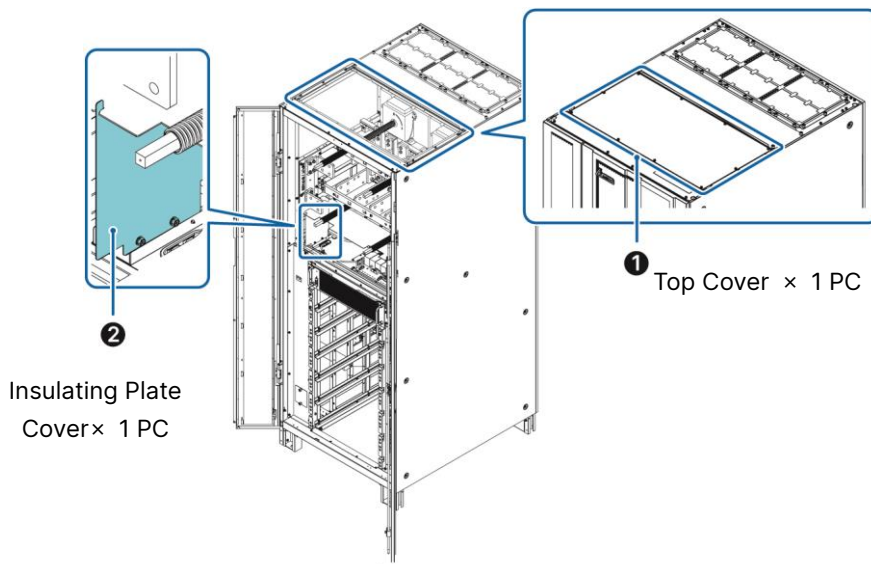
Remove the Top Cover & Insulating Plate's Cover
